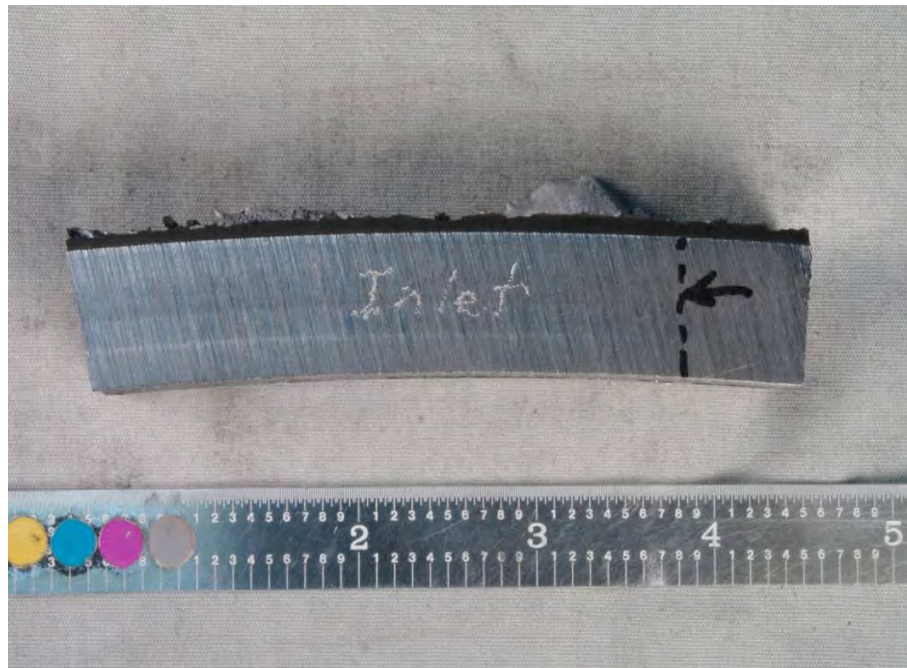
SID 18475 "B4" finger pinned blade attachment showing location of met Sample L349105.
